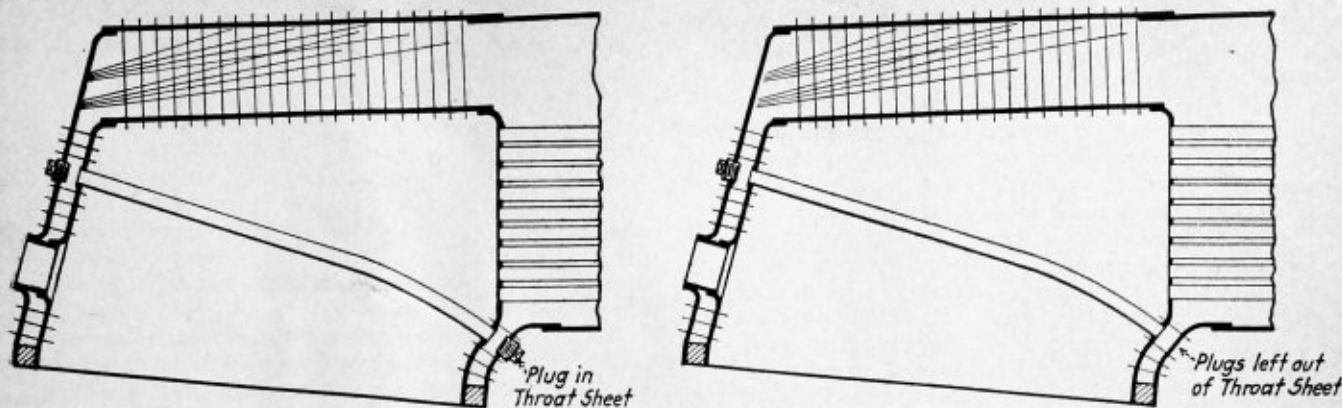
Arch Tubes Arranged in Locomotive Fireboxes Showing Throat Sheet Plug Installed in One and Omitted in the Other
